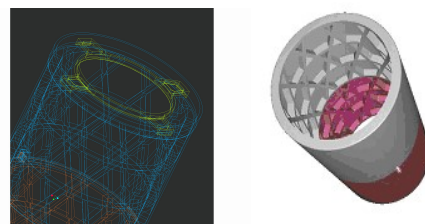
rapid prototyping positive mould and cylindrical silicon mould preparation
